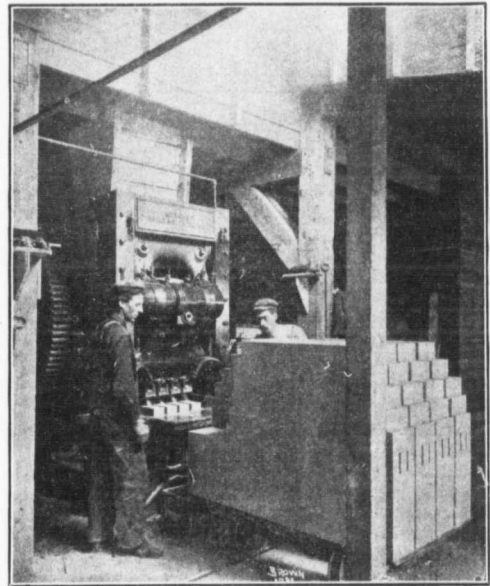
Showing the Four Mold Berg Press and Method of Loading on Trucks from Machine.
